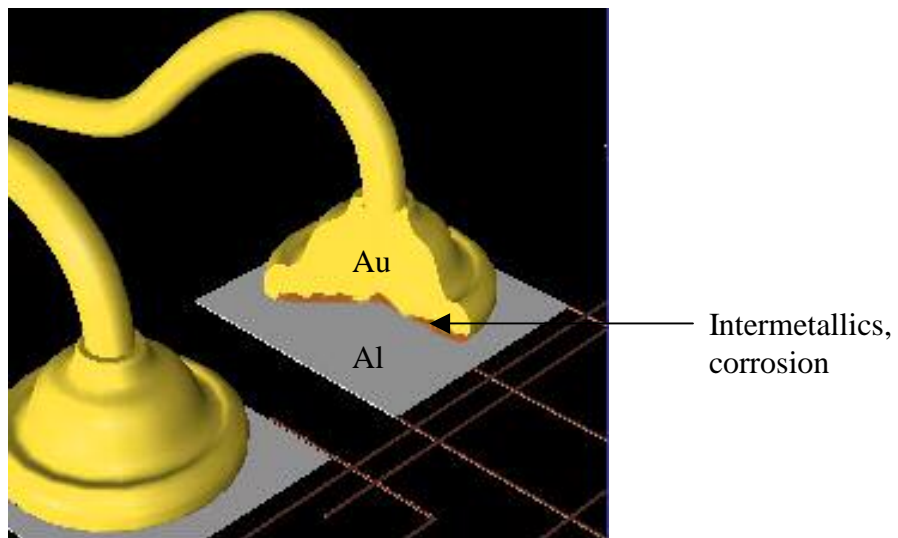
Cross-sectional view of a wirebond showing intermetallic formation
